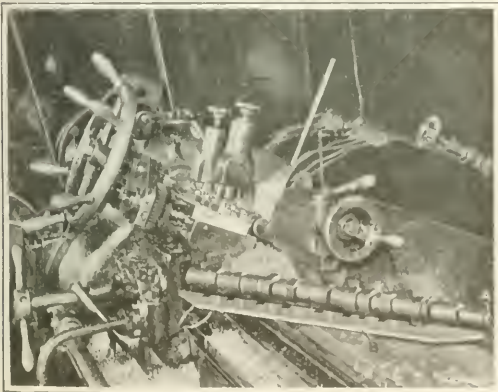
Fitchburg "Lo-Swing" Lathe provided with Eighteen Tools for facing to Width Cams, Bearings, Pump Eccentric and Collar on Cam-shafts
